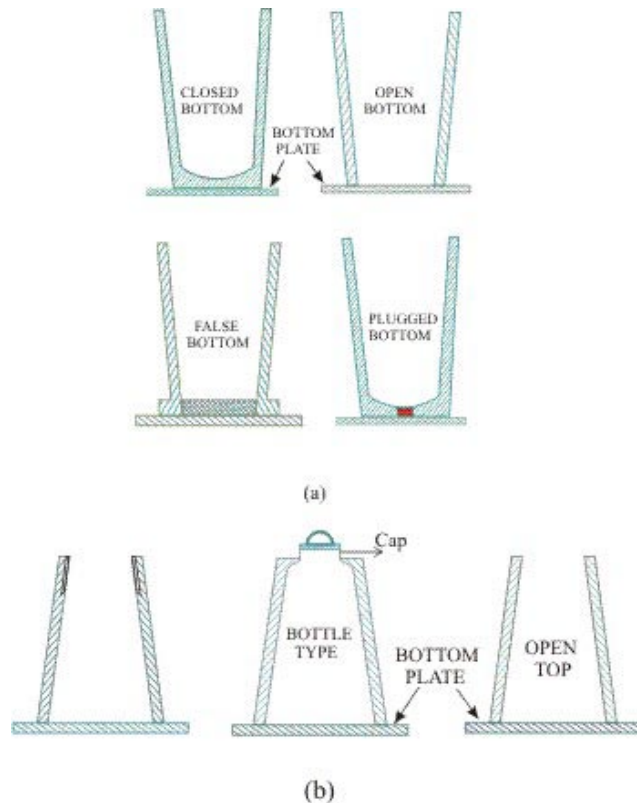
(a) wide end up moulds (b) Narrow end up moulds
